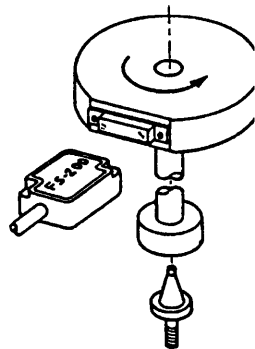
Magneto and Magnetic Sensor Mounting Direction
